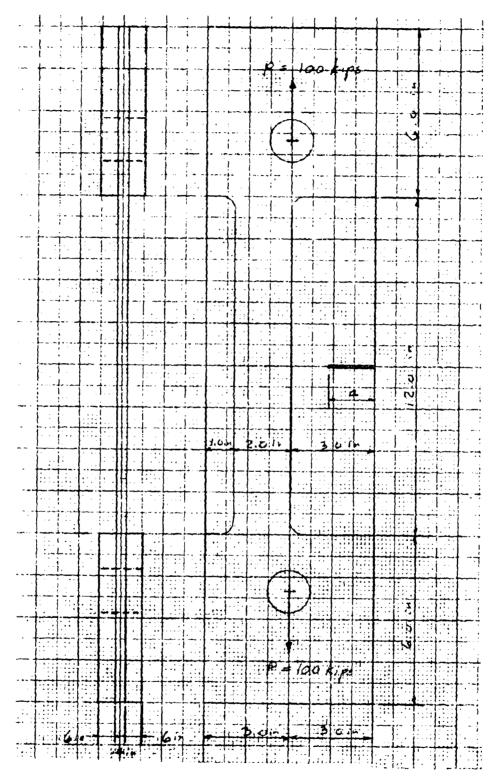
DAMAGE TOLERANCE TEST SPECIMEN
